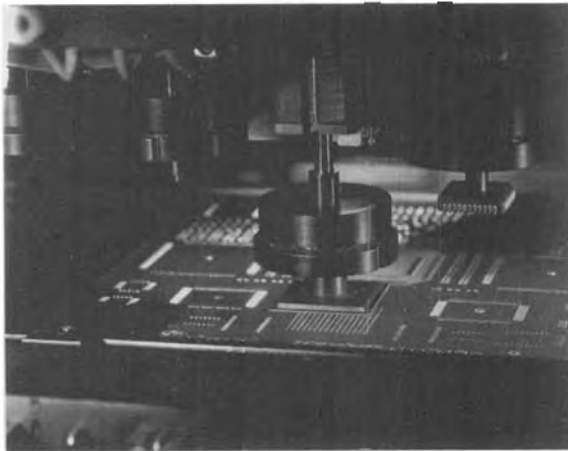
B2-1 Placement of devices to the surface of a board by a pick and place machine. This machine uses a four-spindle head. Four devices are brought to the board at the same time and are positioned to the board one at a time. The component in the foreground is an integrated circuit to be fastened to the board by solder from a ball grid array of solder spheres. There is one solder sphere for each pad shown below the device. The spheres, converted by melting to bumps of solder, are on pads at the bottom of the IC and are not visible in the picture. Devices are held on the "nozzle" by vacuum. The spindle lowers the device to the board and the vacuum is released with an "air kiss" - a slight puff of air to seat the device on the soldering pads. The component in the background, waiting to be placed on the board, is a plastic leadless chip carrier ("PLCC") that will be held on the board with solder paste. (Courtesy Universal Instruments.)
